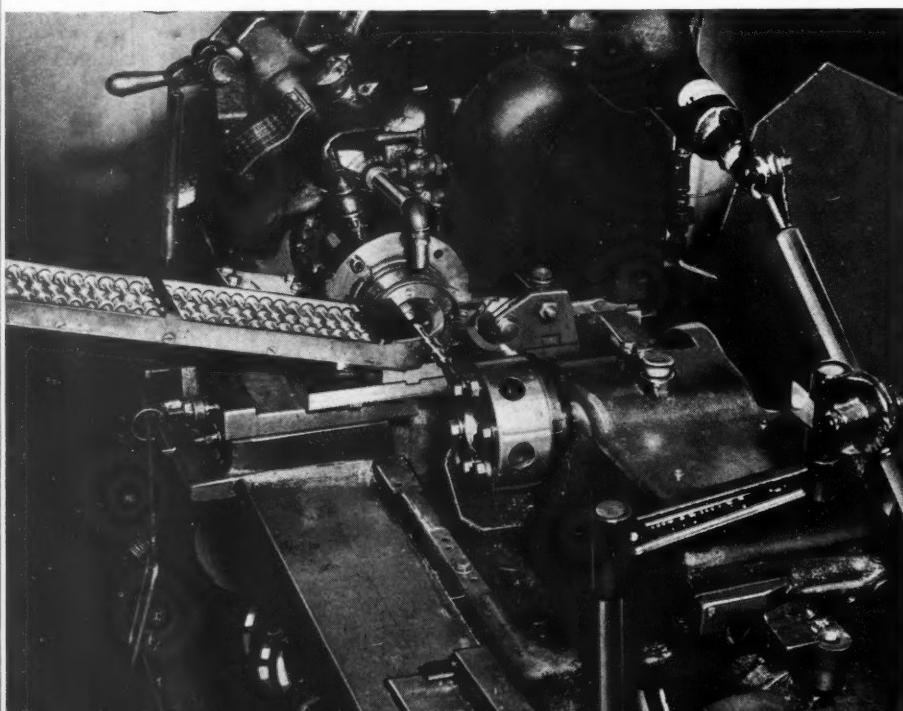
A magazine mounted on the front cross-slide and a loading bar in the turret of a screw machine are employed to load poppet control valves, one at a time, into the collet
